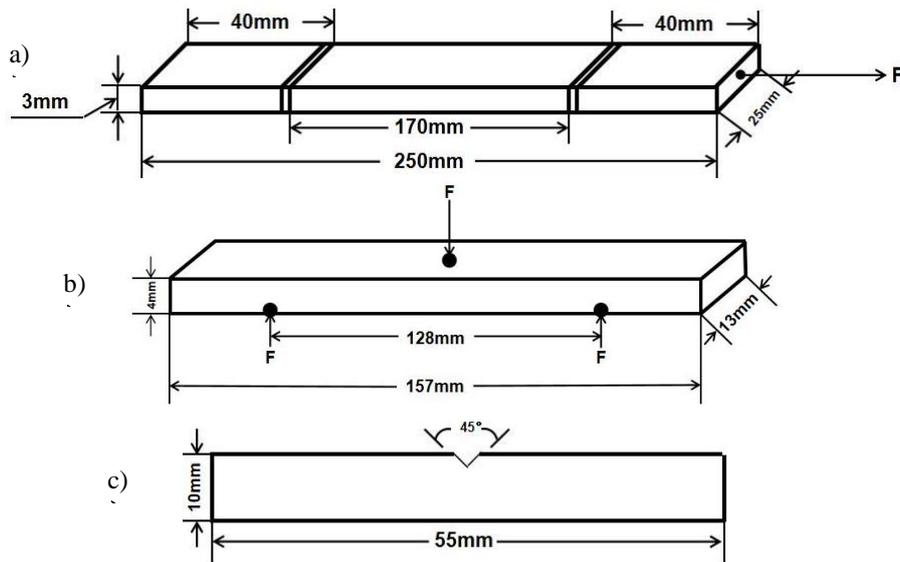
Sample dimensions in: a) tensile; b) bending; and c) impact test
